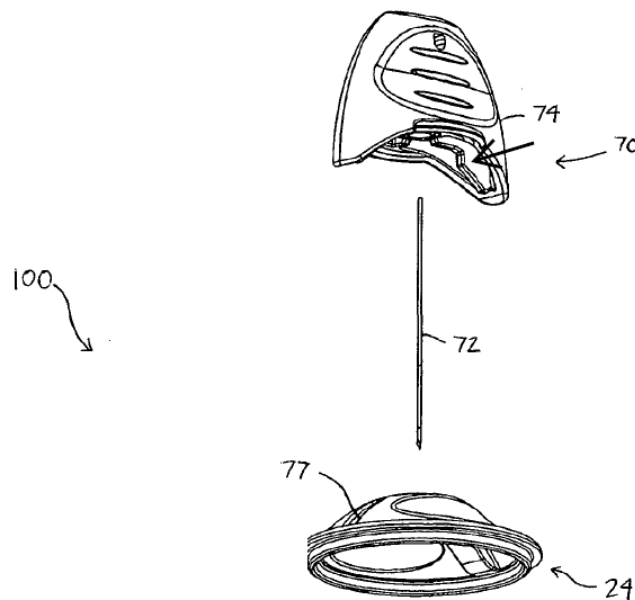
of Turner is a perspective, exploded view of its fluid delivery system including body 20
